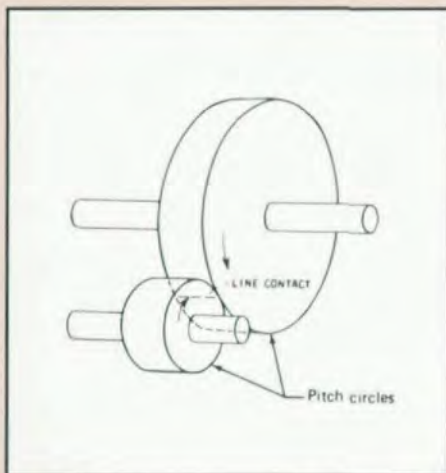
Friction wheels on parallel shafts. (Courtesy Mobil Oil Corporation.)
